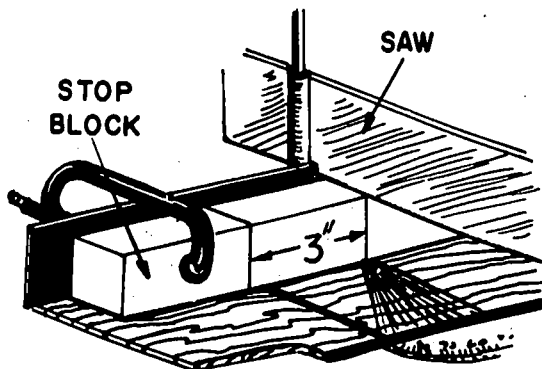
C-1. Cutting Accurately with a Miter Box Saw
